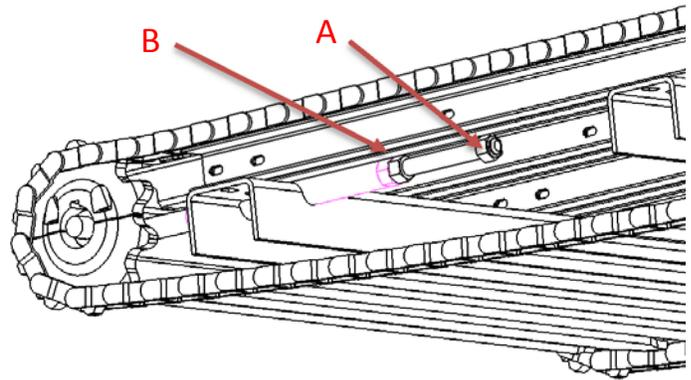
Sectioned View of the Floor Chains with Adjustment Rods
